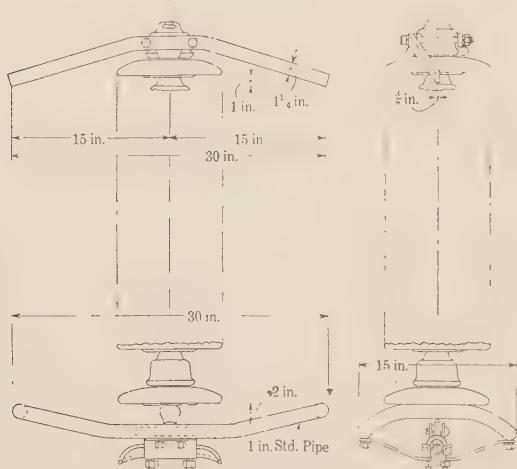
ARCING RING AND HORN ASSEMBLY (1926 INSTALLATION) FOR SINGLE SUSPENSION STRING—PHILO-CANTON LINE
